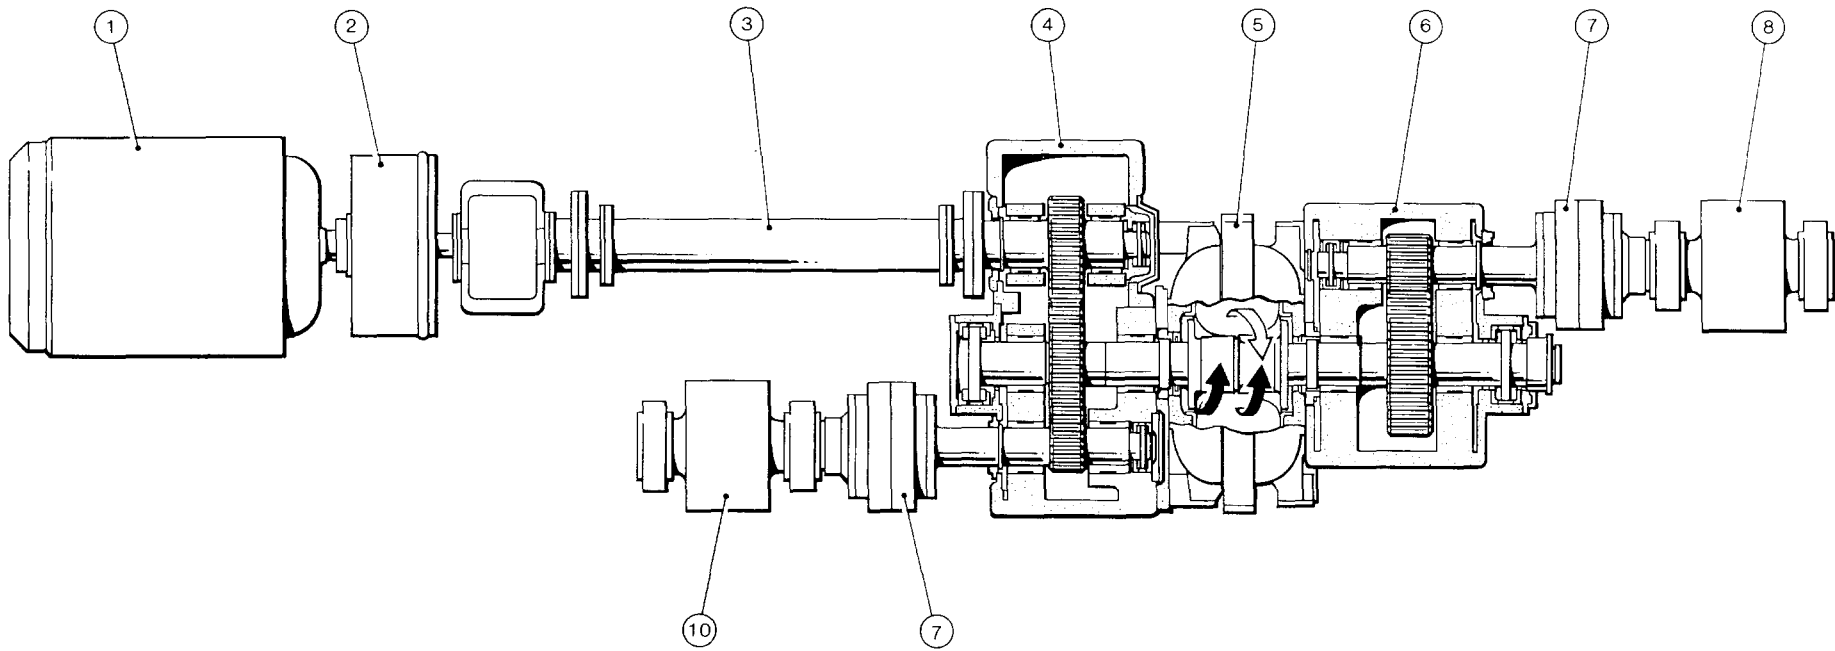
LAYOUT OF MAIN MECHANICAL COMPONENTS FOR PHASE 2 TESTING
